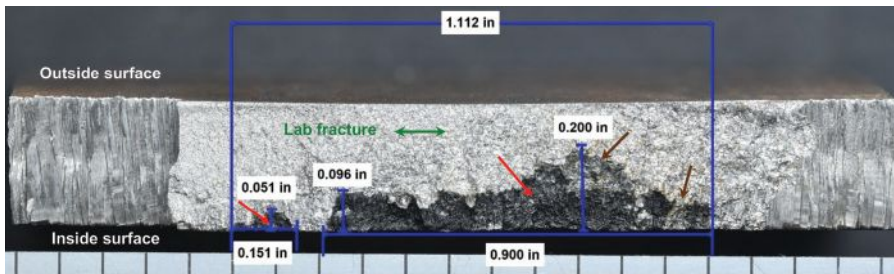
Photograph showing one half of the crack surface. Scale divisions are 0.1 in (2.5 mm).
